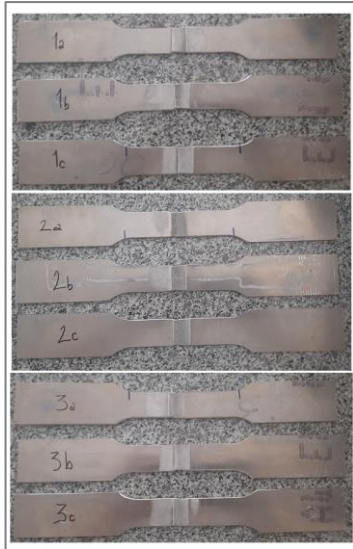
The tensile test results show the fractures occurred in the HAZ region at the edge of the weld seam.
